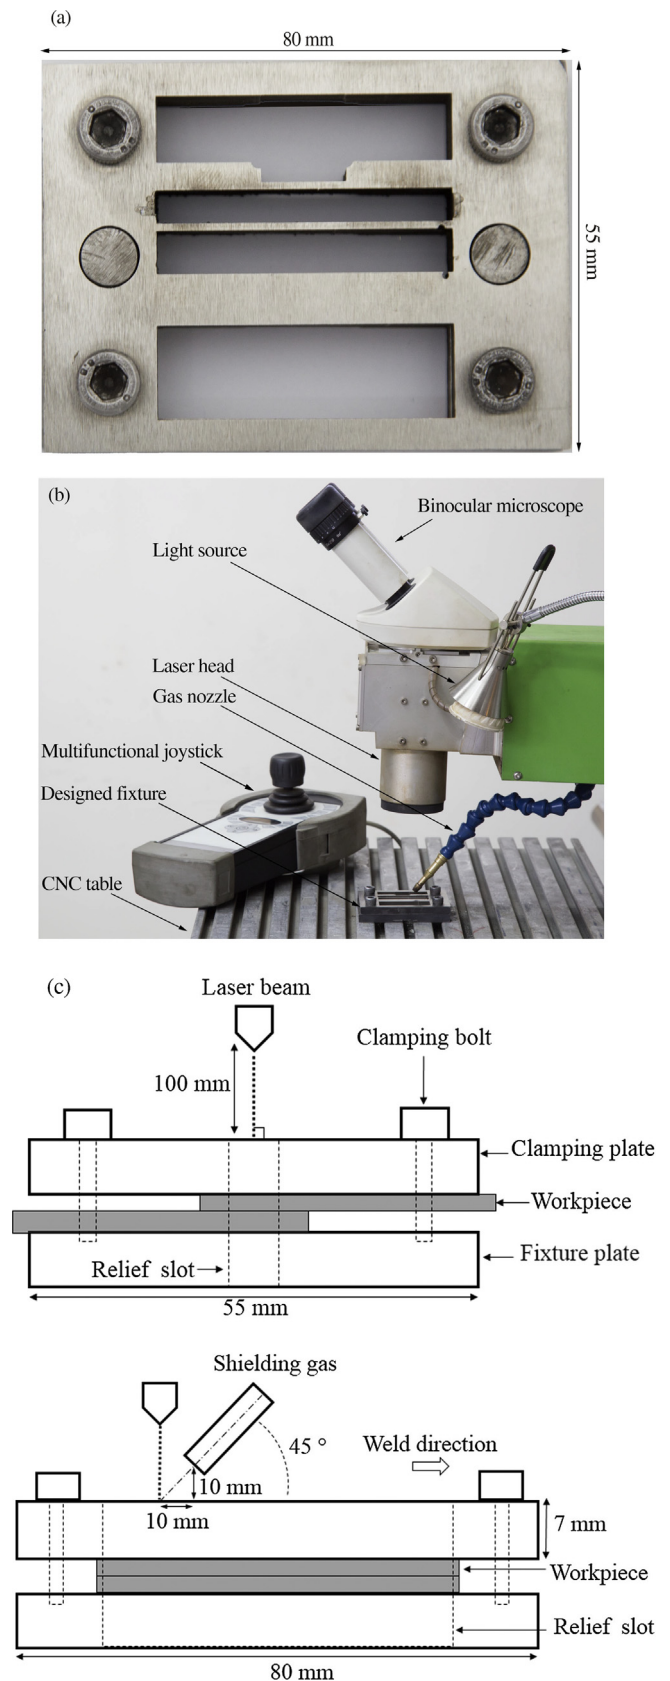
(a) Designed fixture, (b) and (c) actual image and schematic images of laser welding process.
